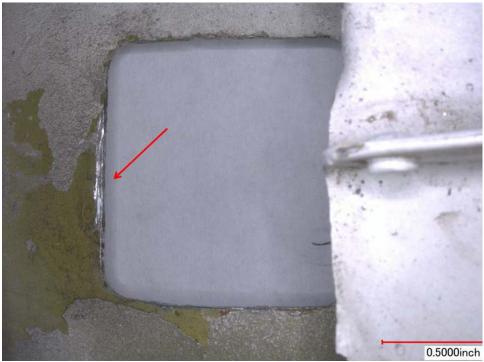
Damage at the edge of the pushrod access hole. The damage is on the forward side of the elevator spar, outboard edge.
